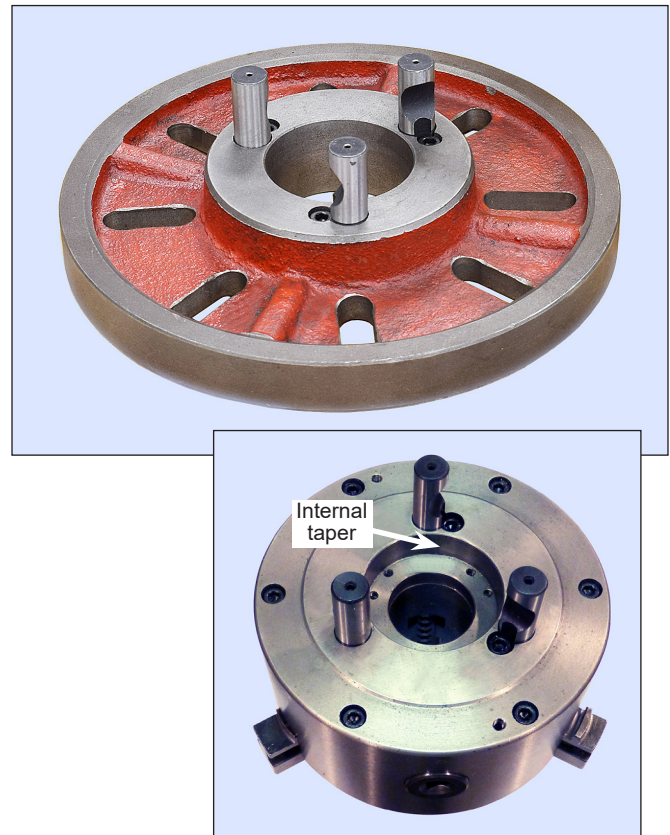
D1-4 mounting studs on the chuck & faceplate
